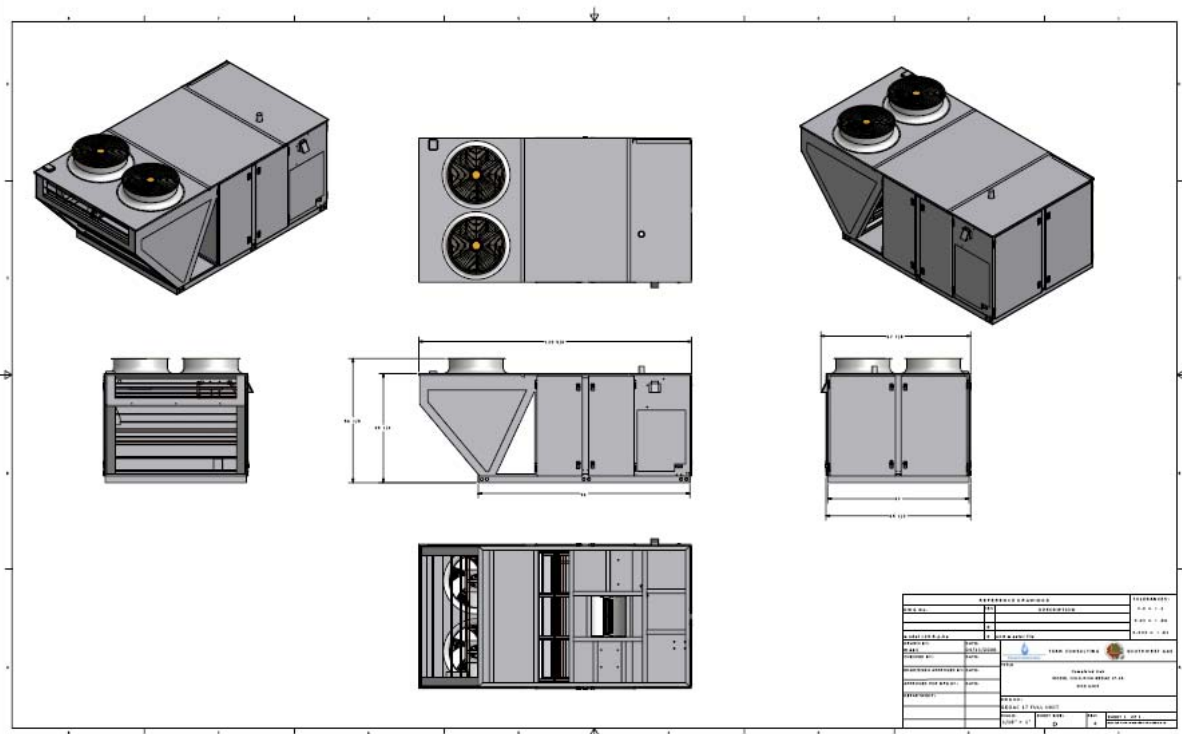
3-D CAD drawings of the Model 5 demonstration gas heat pump.
